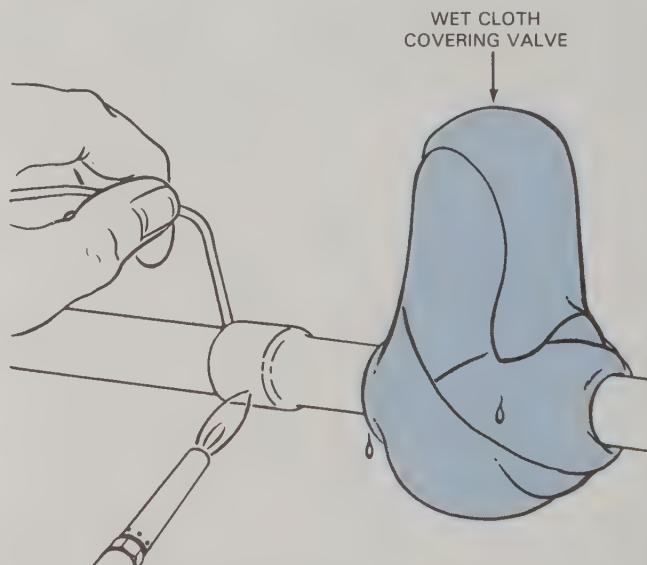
A heavy metal component, such as a valve, will act as a heat sink and draw heat away from the area being brazed. This heat could damage the component. To prevent damage, the valve or other component is sometimes wrapped in wet cloth. (Aeroquip)
